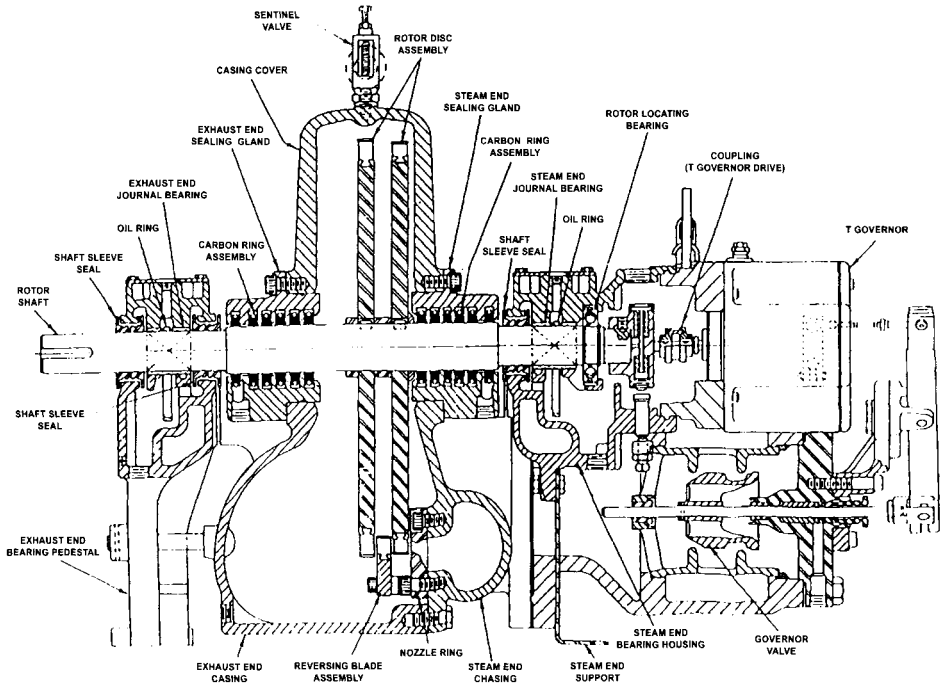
Typical general purpose (pump drive) turbine assembly (Courtesy of Elliott Company)
